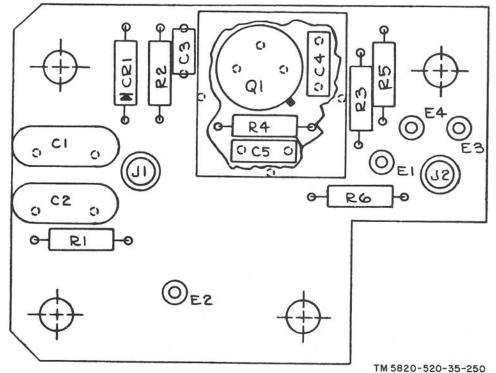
Printed circuit board 2A4A3, parts location diagram.
